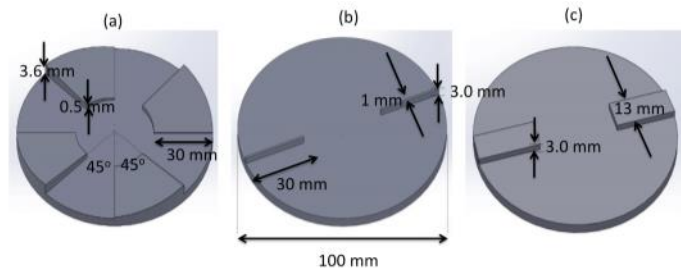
(a) Angled pad, (b) 1mm wall and (c) 13 mm wall
